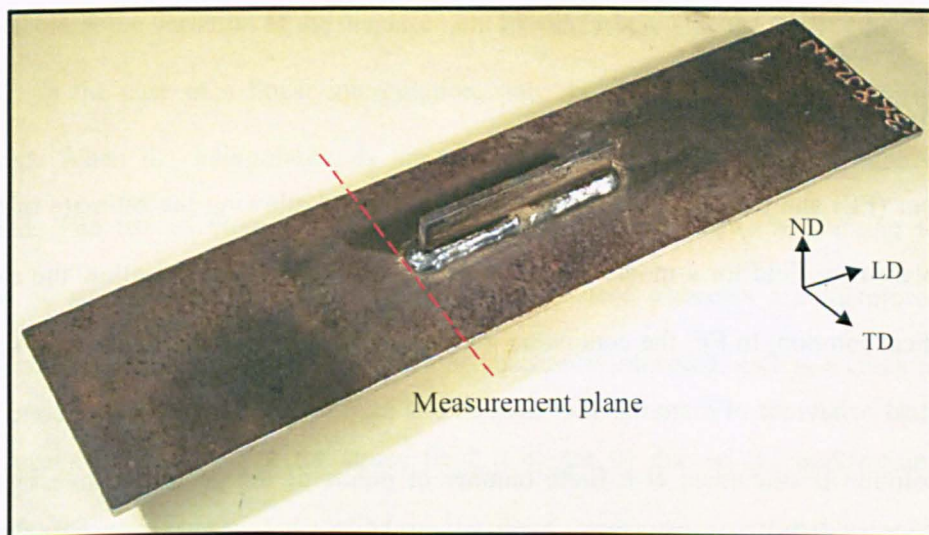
Fillet welded specimen incorporating longitudinal attachments, measurement plane also shown.
